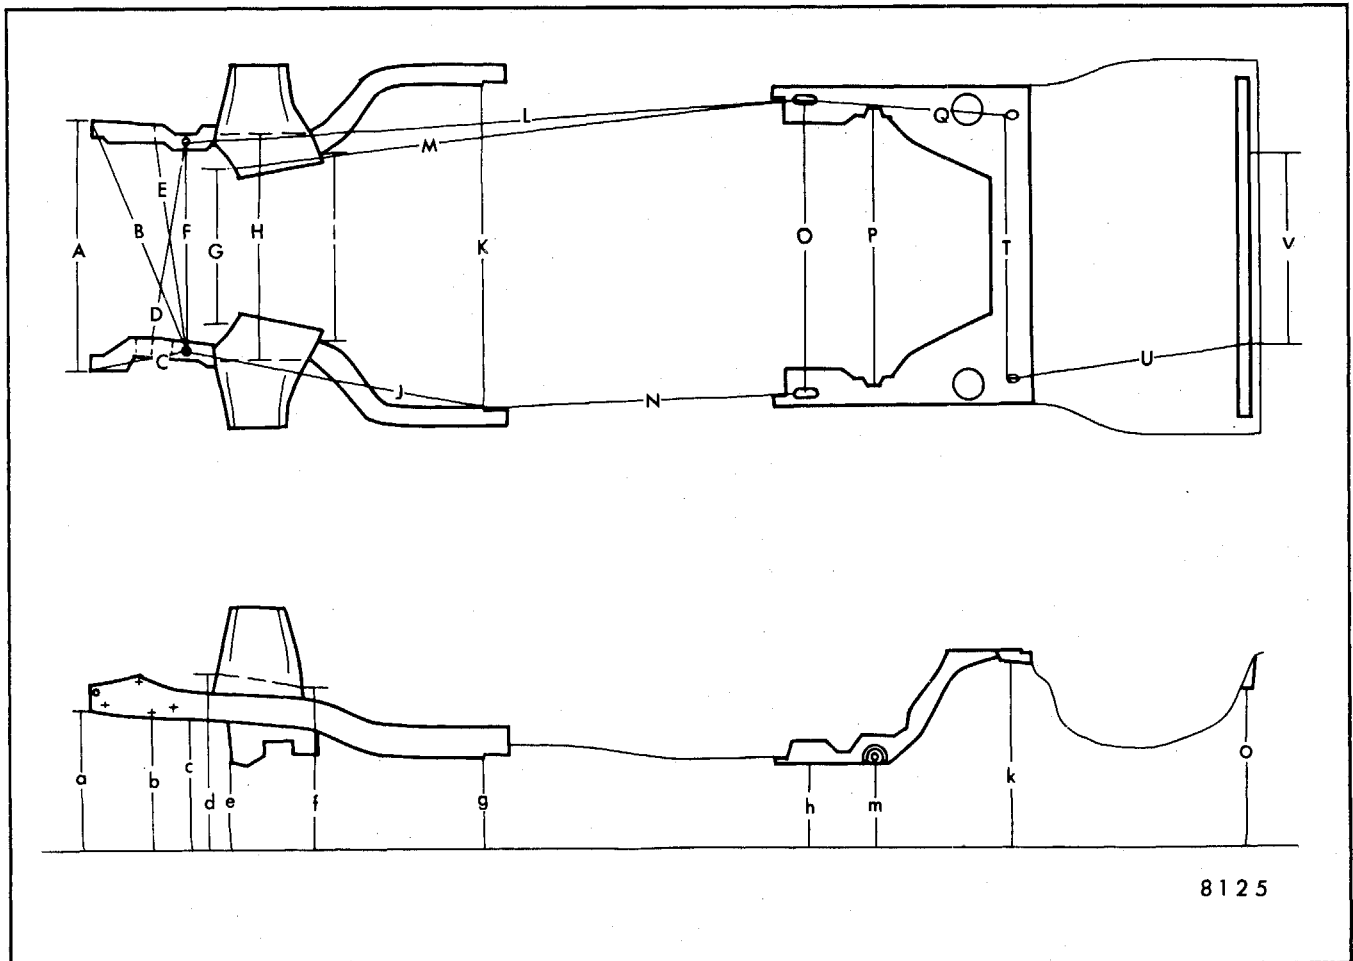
Horizontal and Vertical Checking Dimensions - "H-07 and 27" Styles
